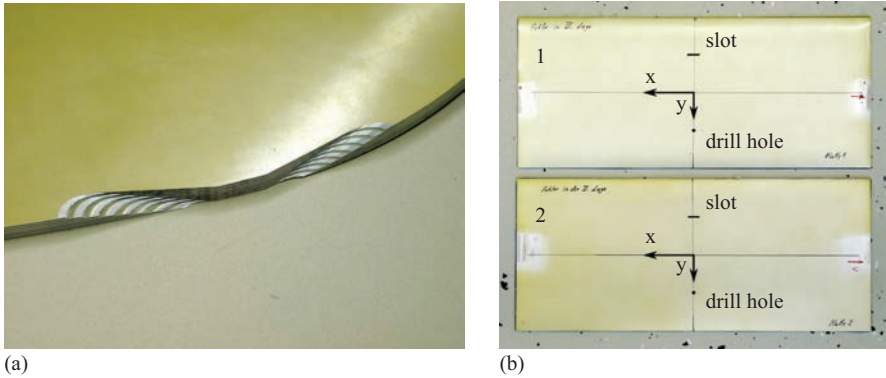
Test specimen (GLARE): (a) test piece of A380 fuselage (cabin window); (b) two specimens (each 350 mm \times 150 mm) with machined defects included in the second aluminum layer (2) and third aluminum layer (1); same defects in both Al layers: a drill hole (diameter = 2 mm) and a through slot (1 mm \times 10 mm)
